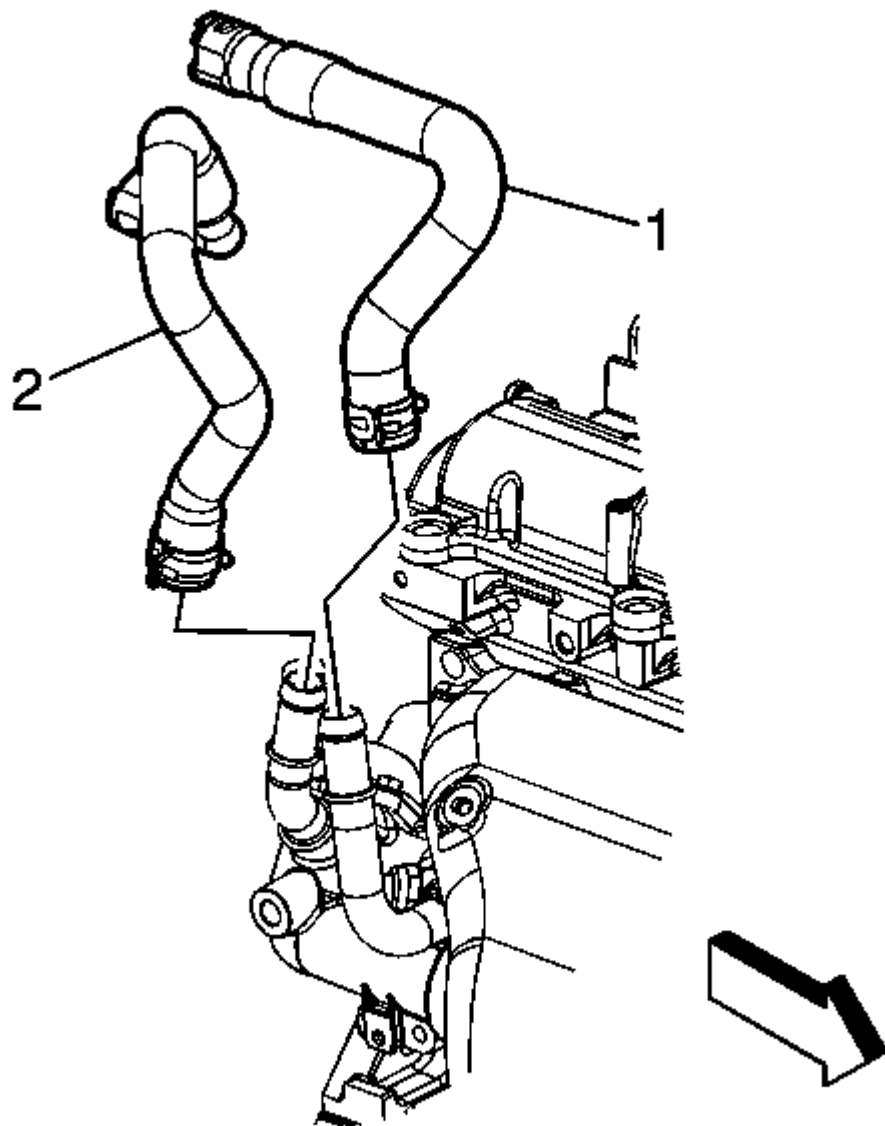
Identifying Heater Inlet & Outlet Hoses
